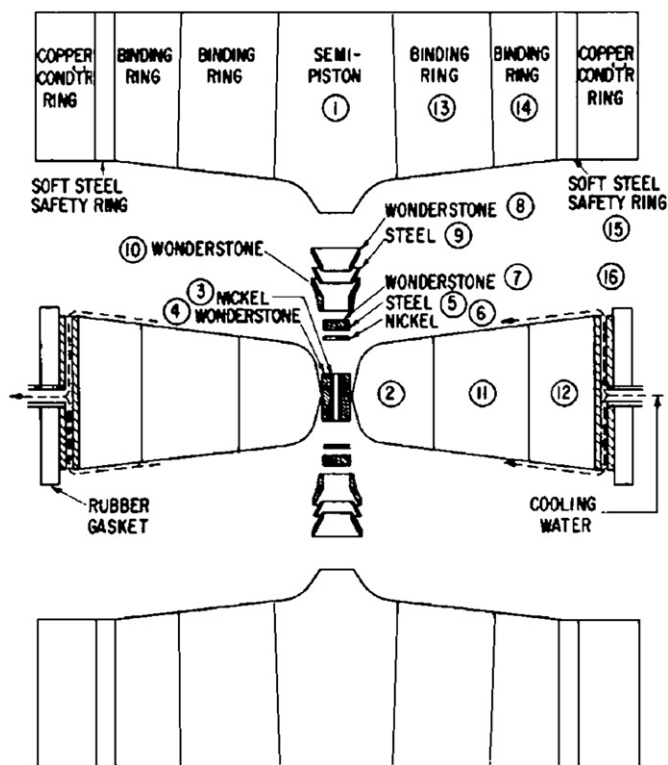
The “belt”: high-temperature, high-pressure apparatus. “Exploded” assembly. ② Carboly chamber, ⑪⑫ Hardened steel binding ring ⑬ soft steel safety ring.
